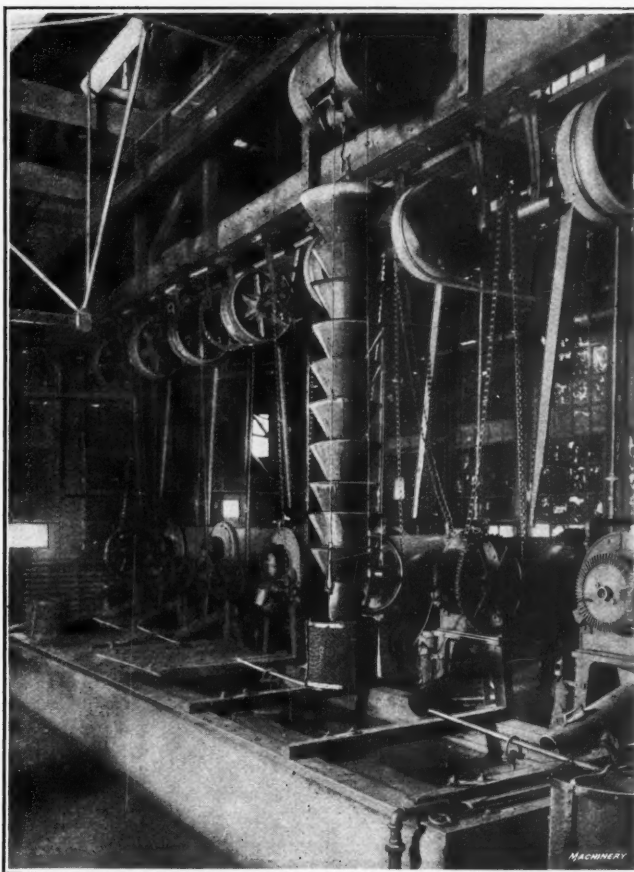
Discharge End of American Rotary Gas Furnaces, showing Quenching Tanks and Deflector through which Balls are delivered to Baskets at Bottom of Tanks
